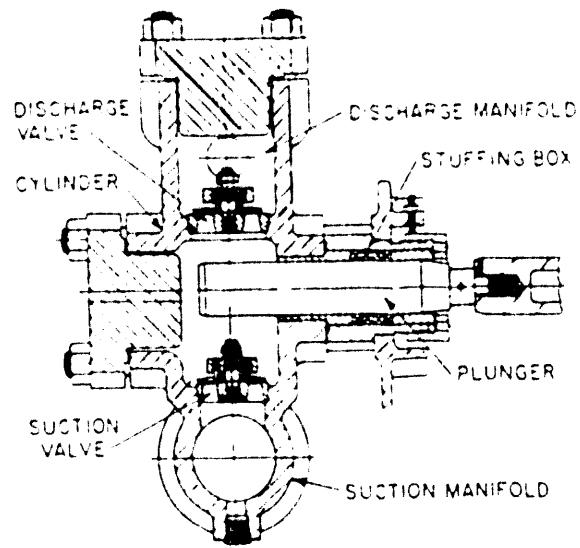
Liquid End — Reciprocating Pump.[3.7]
